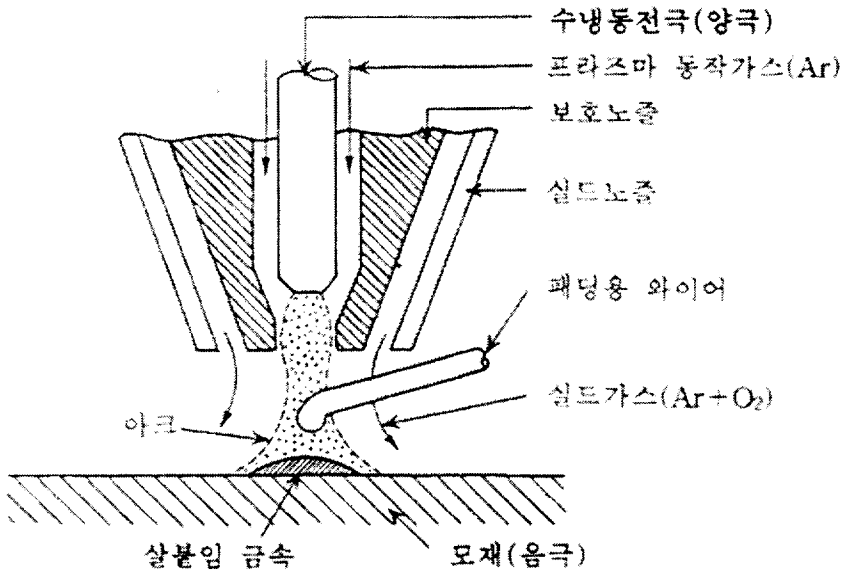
Schematic drawing of positive polarity in plasma arc welding
